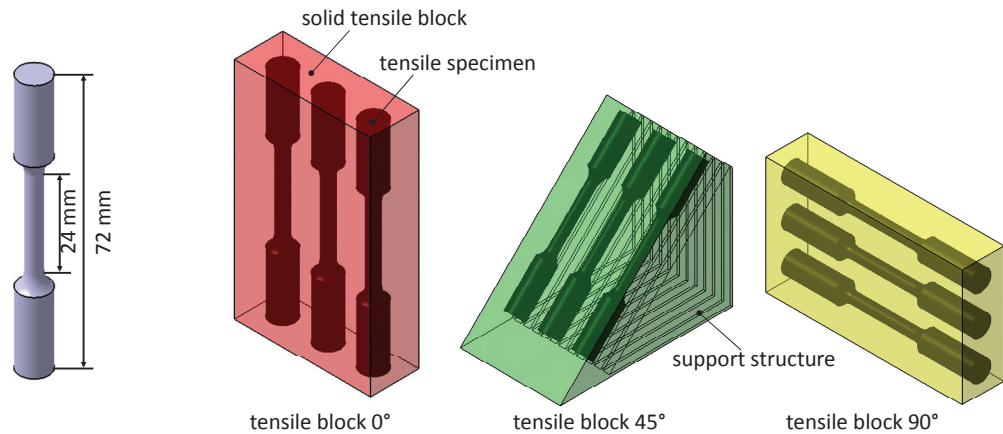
Schematic view of the tensile blocks and the tensile specimens that are machined out of the block
